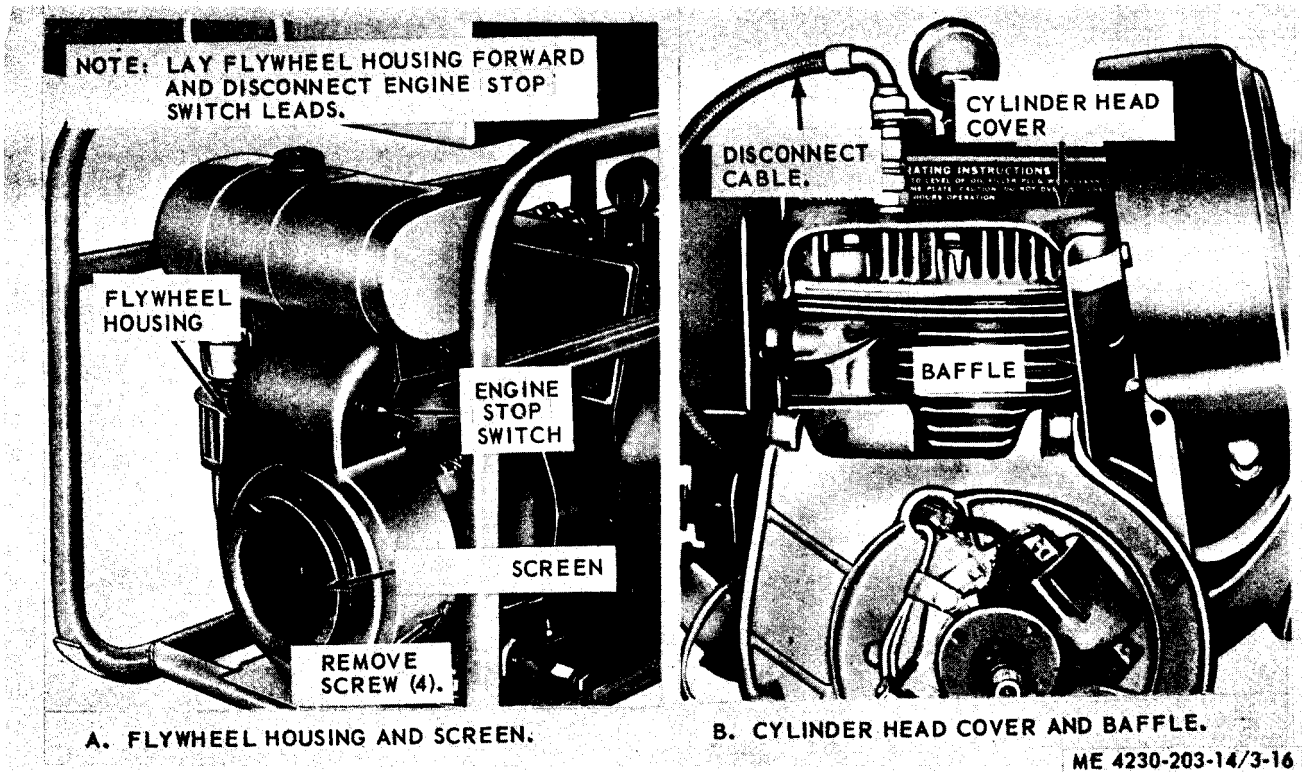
Flywheel housing, screen, and baffles, removal and installation.
